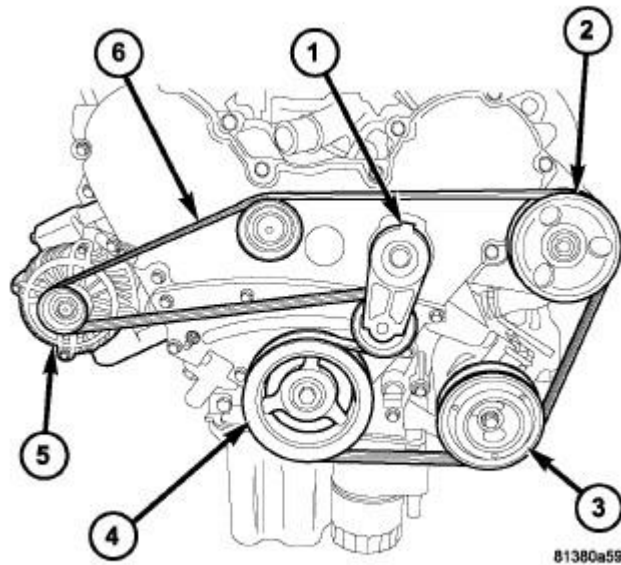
ACCESSORY DRIVE BELT ROUTING
